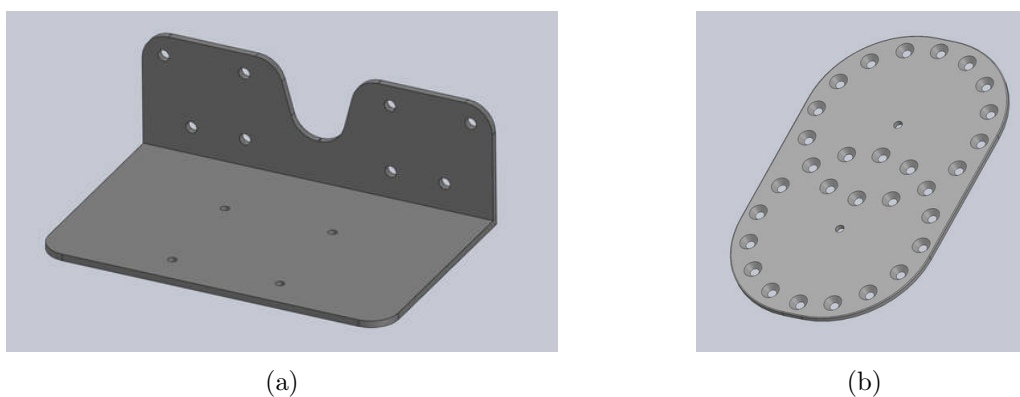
(a) a CAD model of the laser mounts, (b) a CAD model of the arm extension plate.
